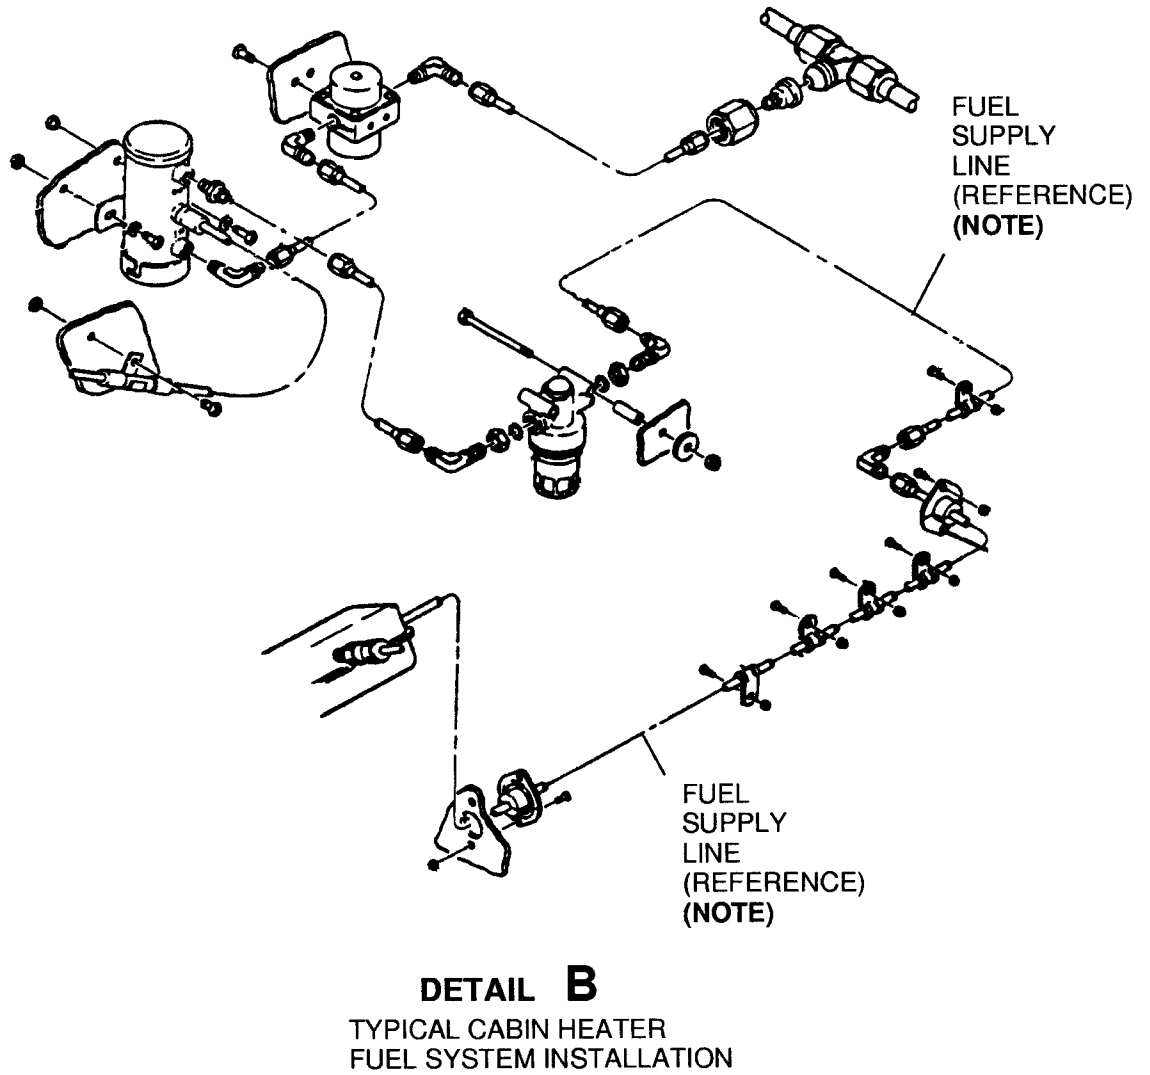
Cabin Heater Fuel Line Inspection (Sheet 2)
